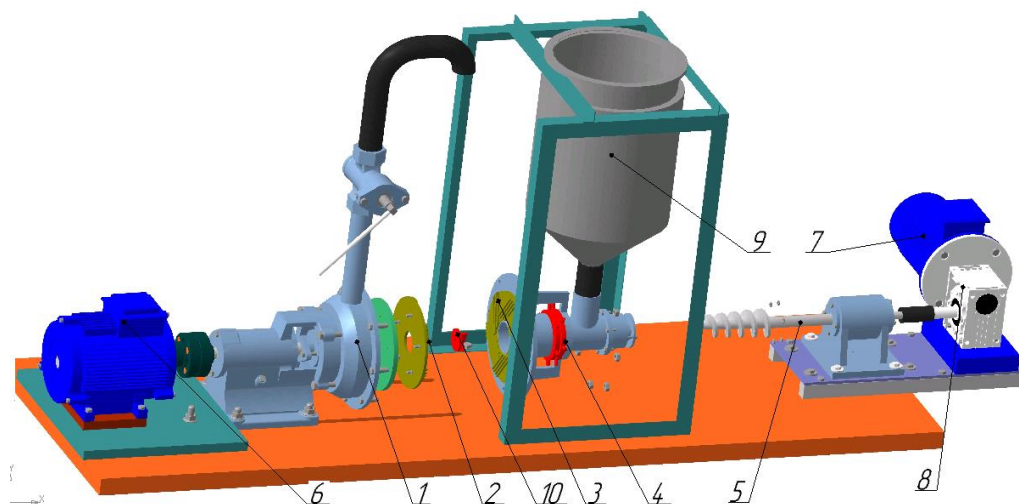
Grinding unit design (1 - grinding zone; 2 - rotor; 3 - stator; 4 - adjusting device; 5 - screw feeder; 6 - electric motor of the rotor; 7 - electric motor of the screw feeder drive; 8 - worm gear reducer of the screw feeder drive; 9 - fibrous mass container; 10 - rotary spreader)
